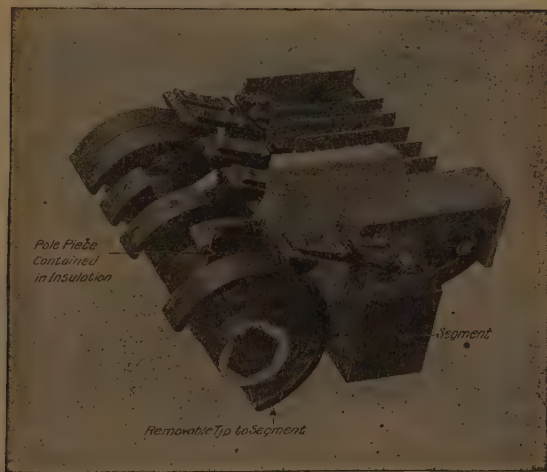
,552.—Detail of General Electric type K magnetic blow out showing pole piece, segment and removable tip.
